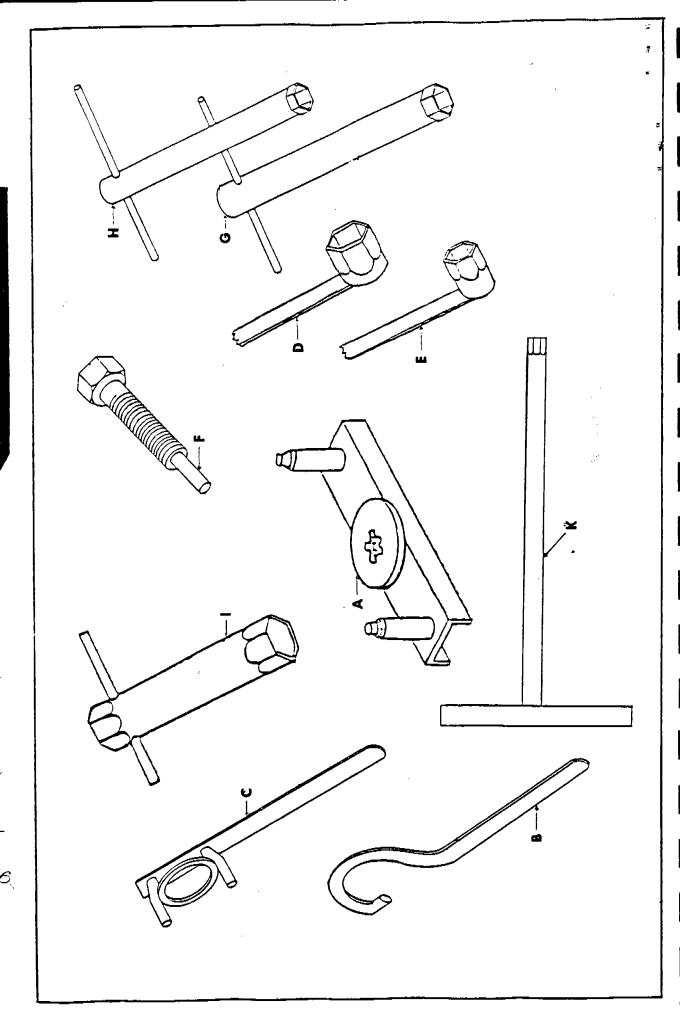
SPECIAL SCOOTER CAR TOOLS
